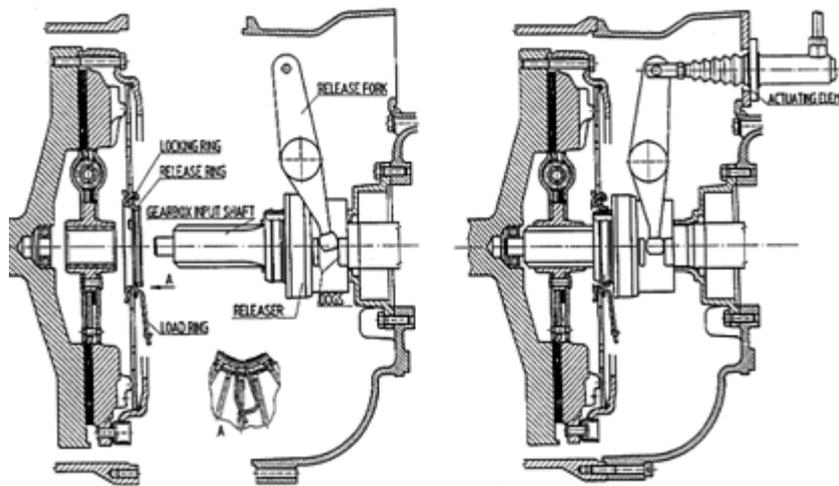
Pull-type Clutch Status Before and After Transmission Installation
